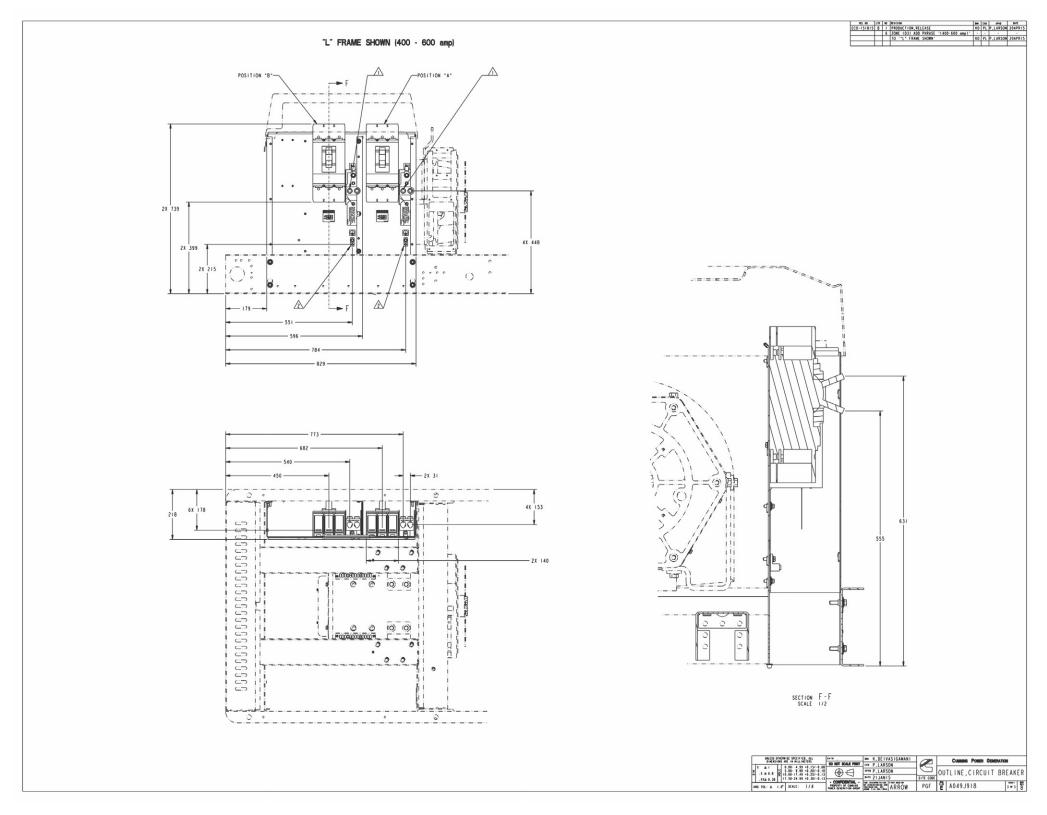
CIRCUIT BREAKER OUTLINE (SHEET 3 OF 3)
